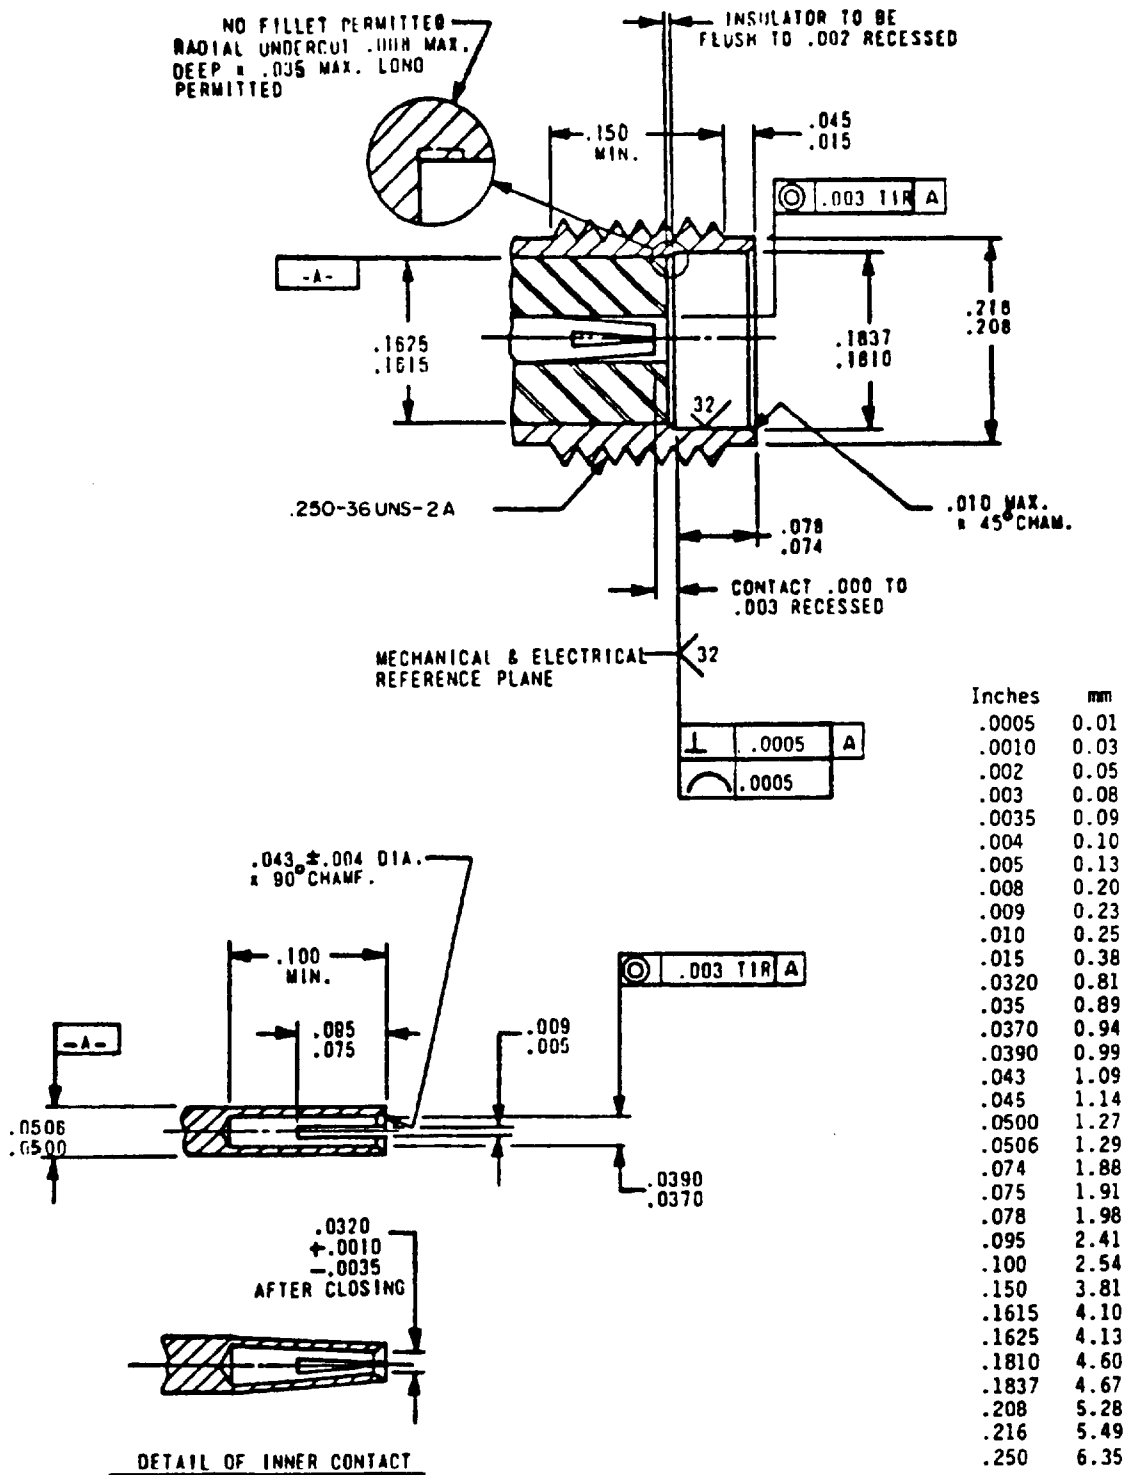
Interface, test connector, series SMA, socket contact.
